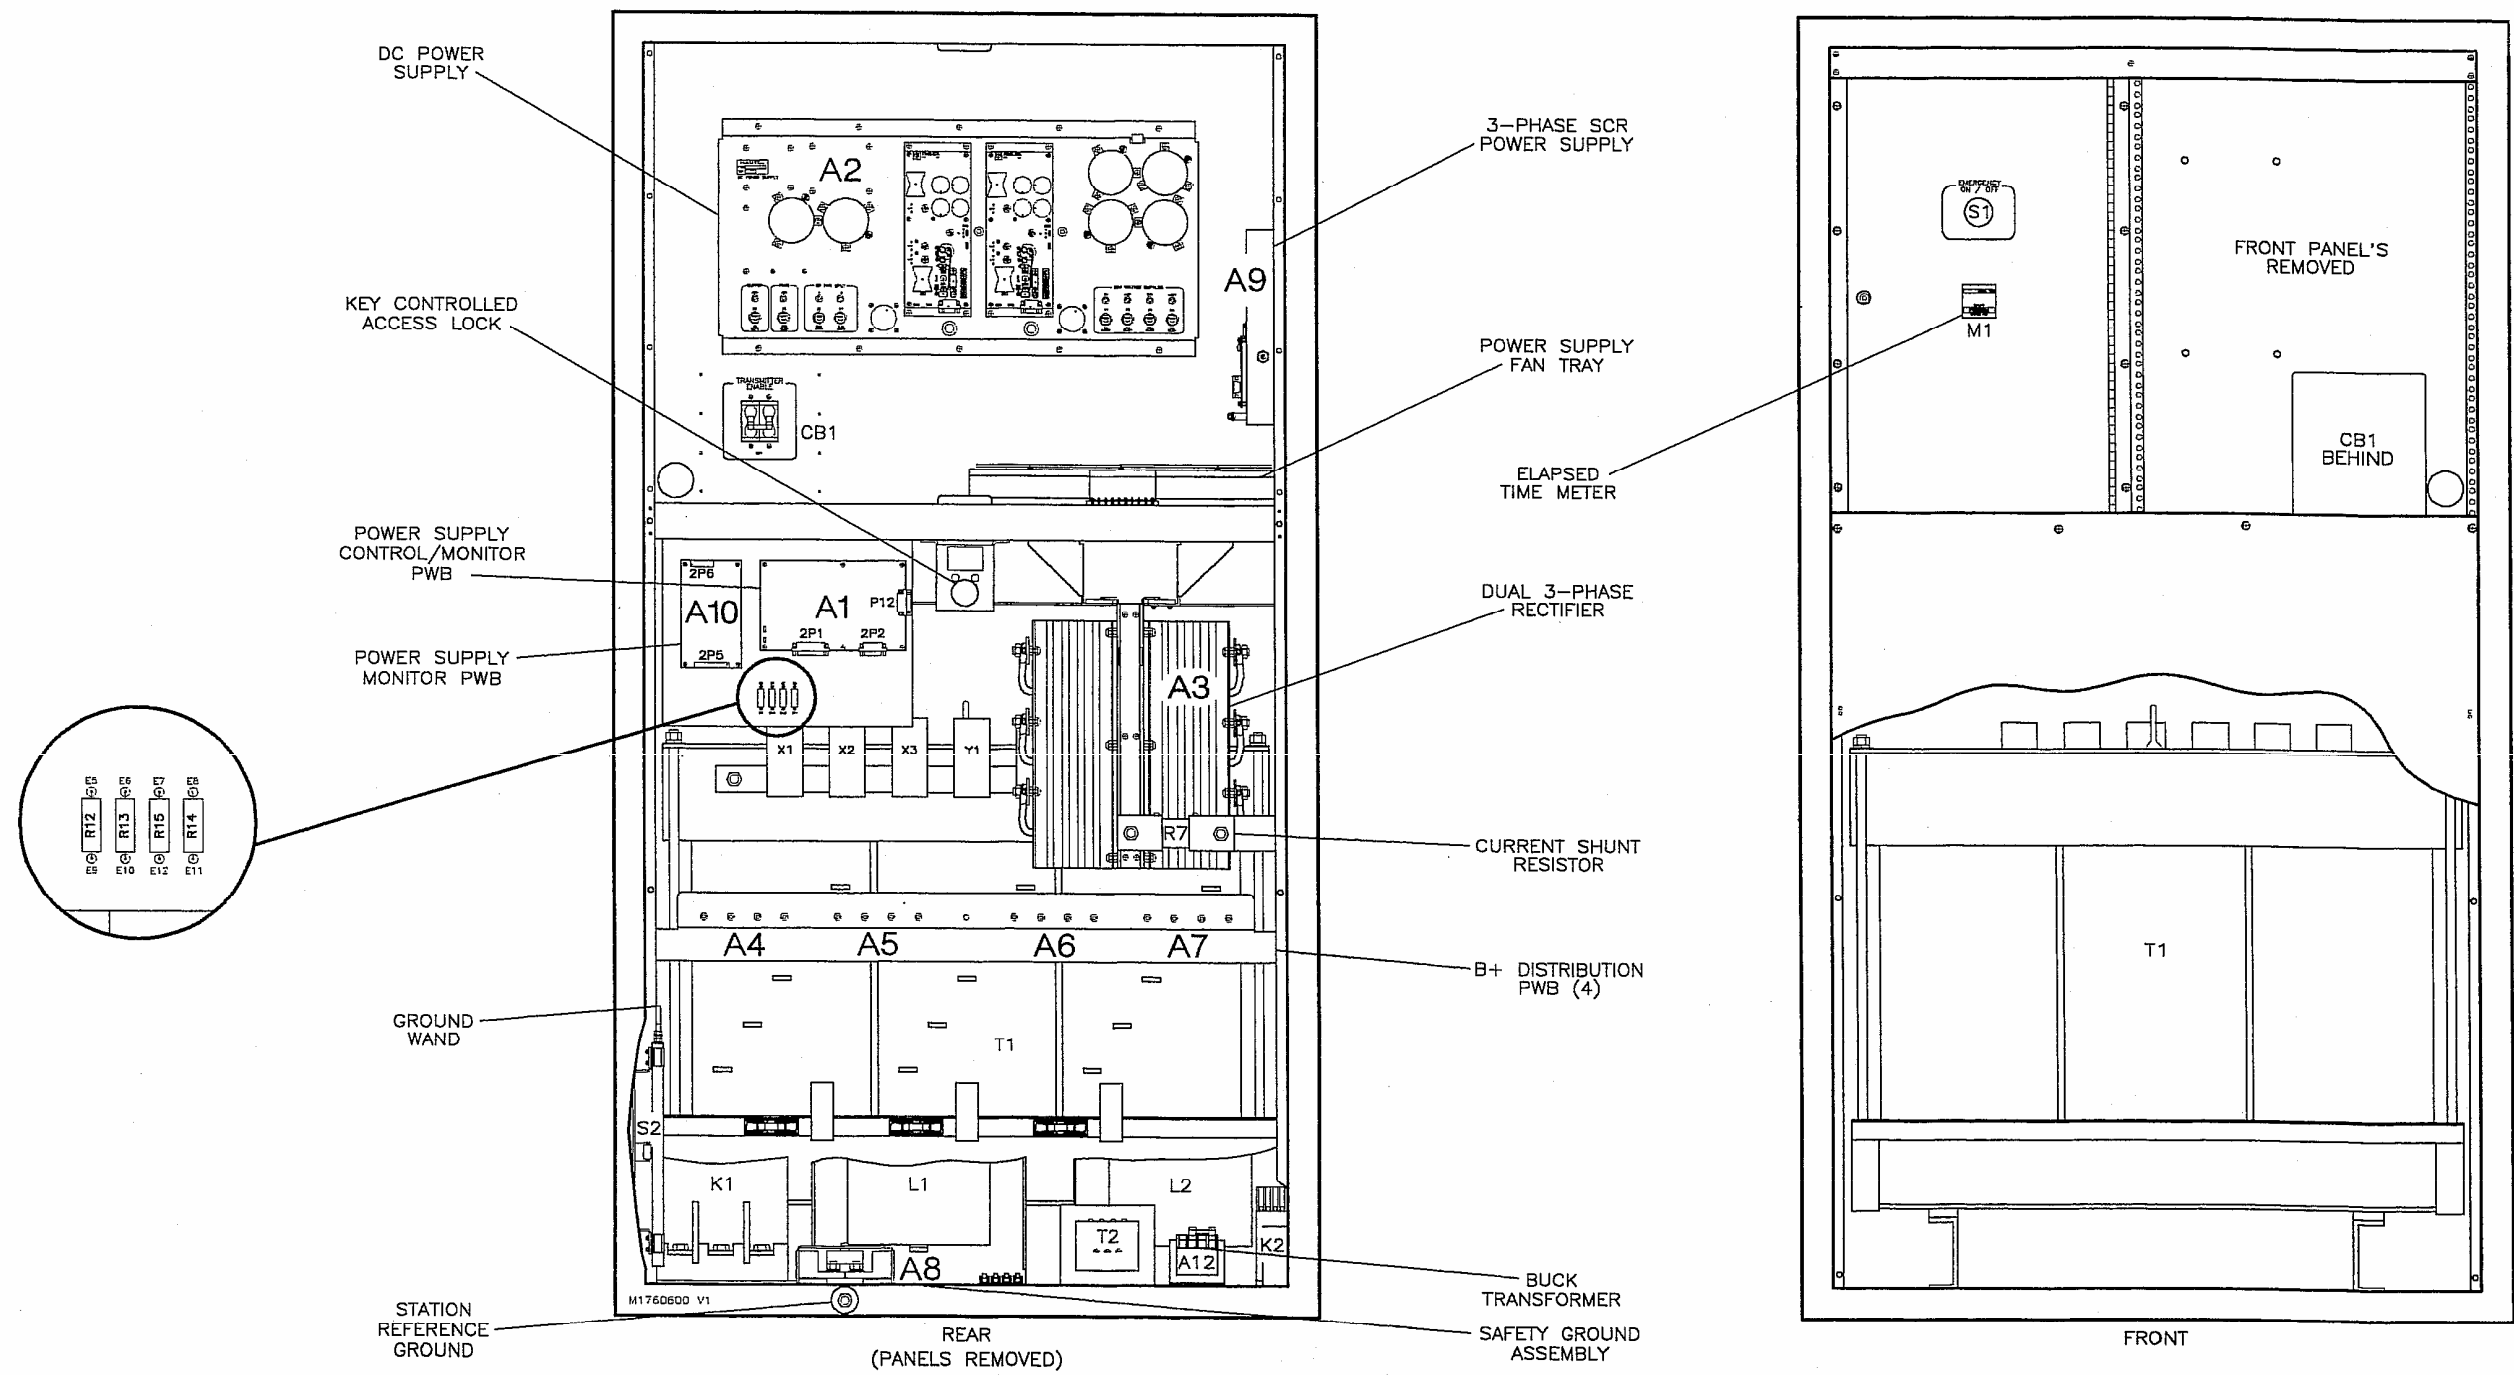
Assembly Detail - NAR222B AC/DC Power Supply Cabinet (Front/Rear)
